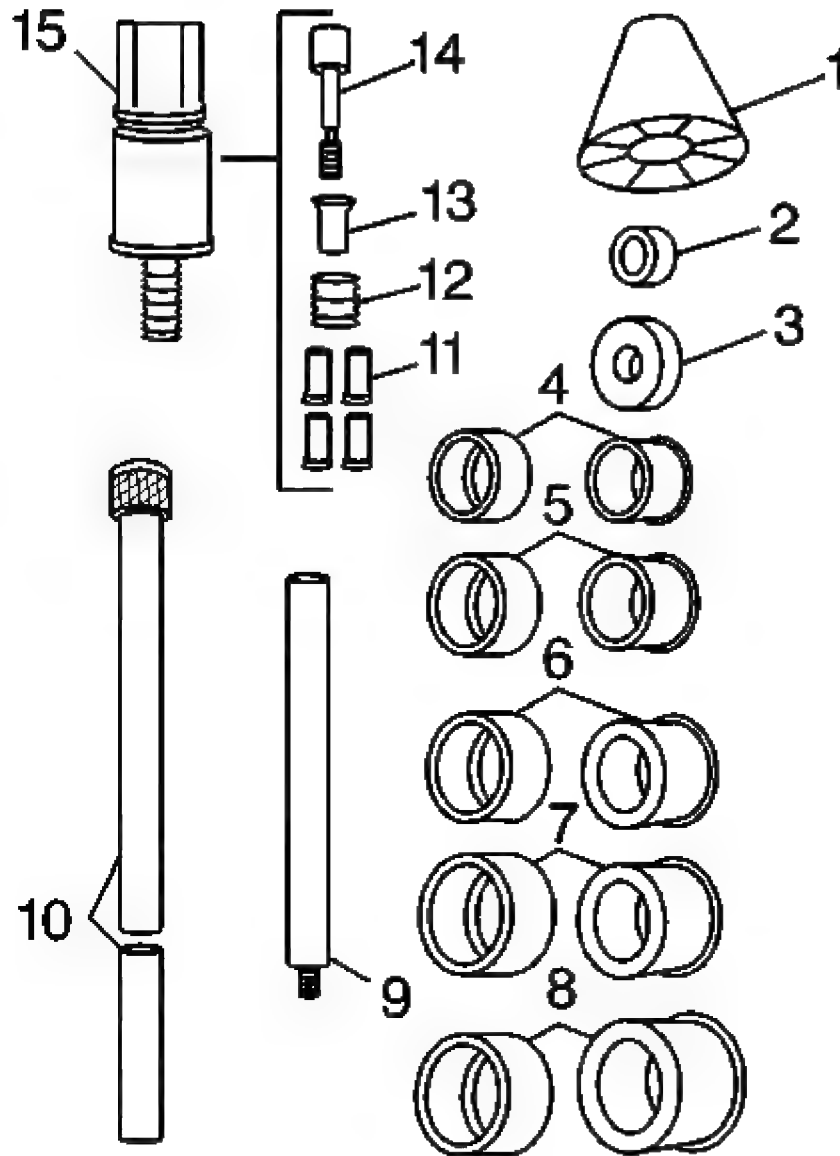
View Of J 33049 Camshaft Bearing Service Kit Components
